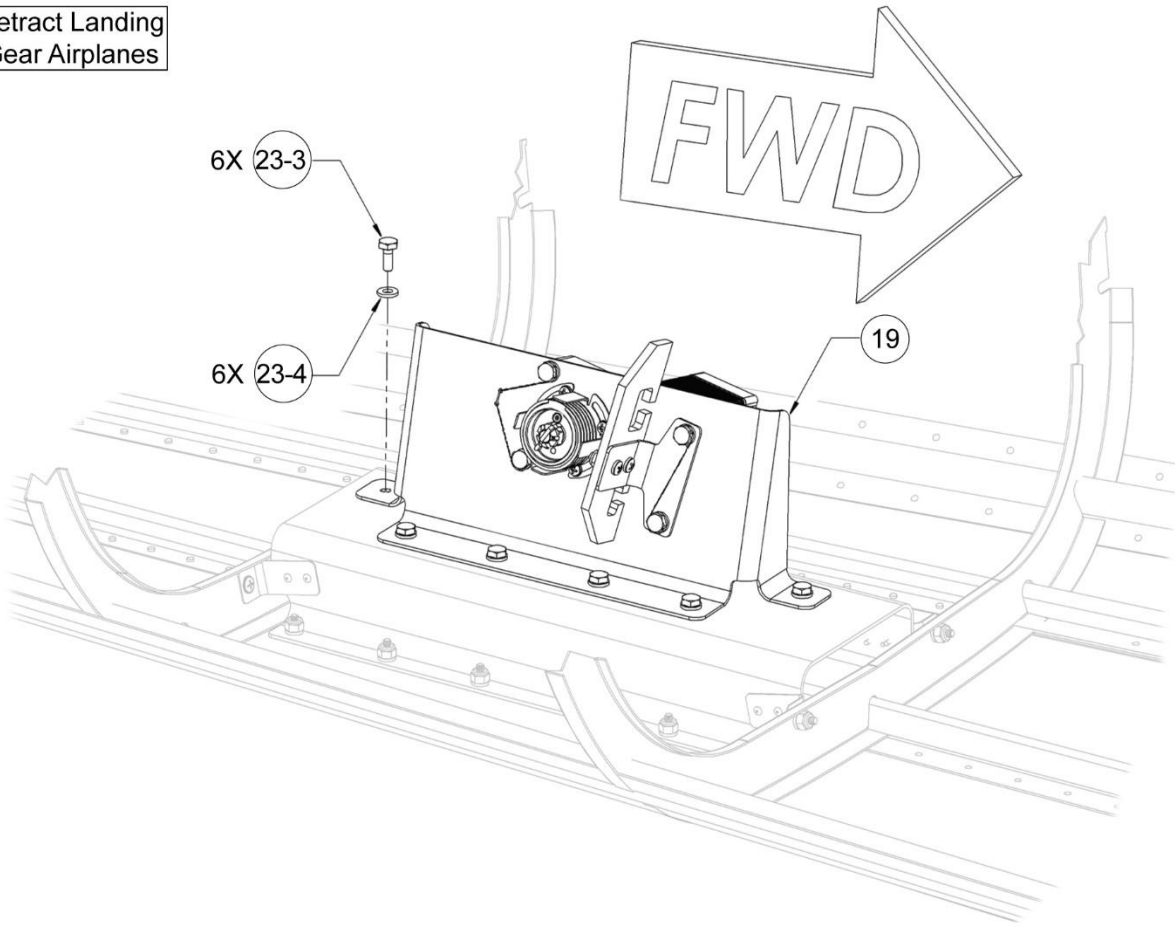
Attaching Pitch Servo Riser Bracket Assembly to Base Bracket
